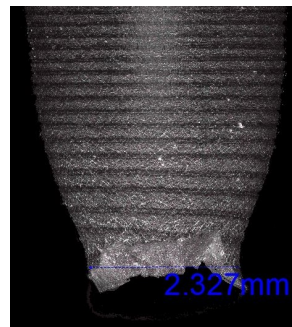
Close-up view of the fracture of the SS304L tensile specimen.
